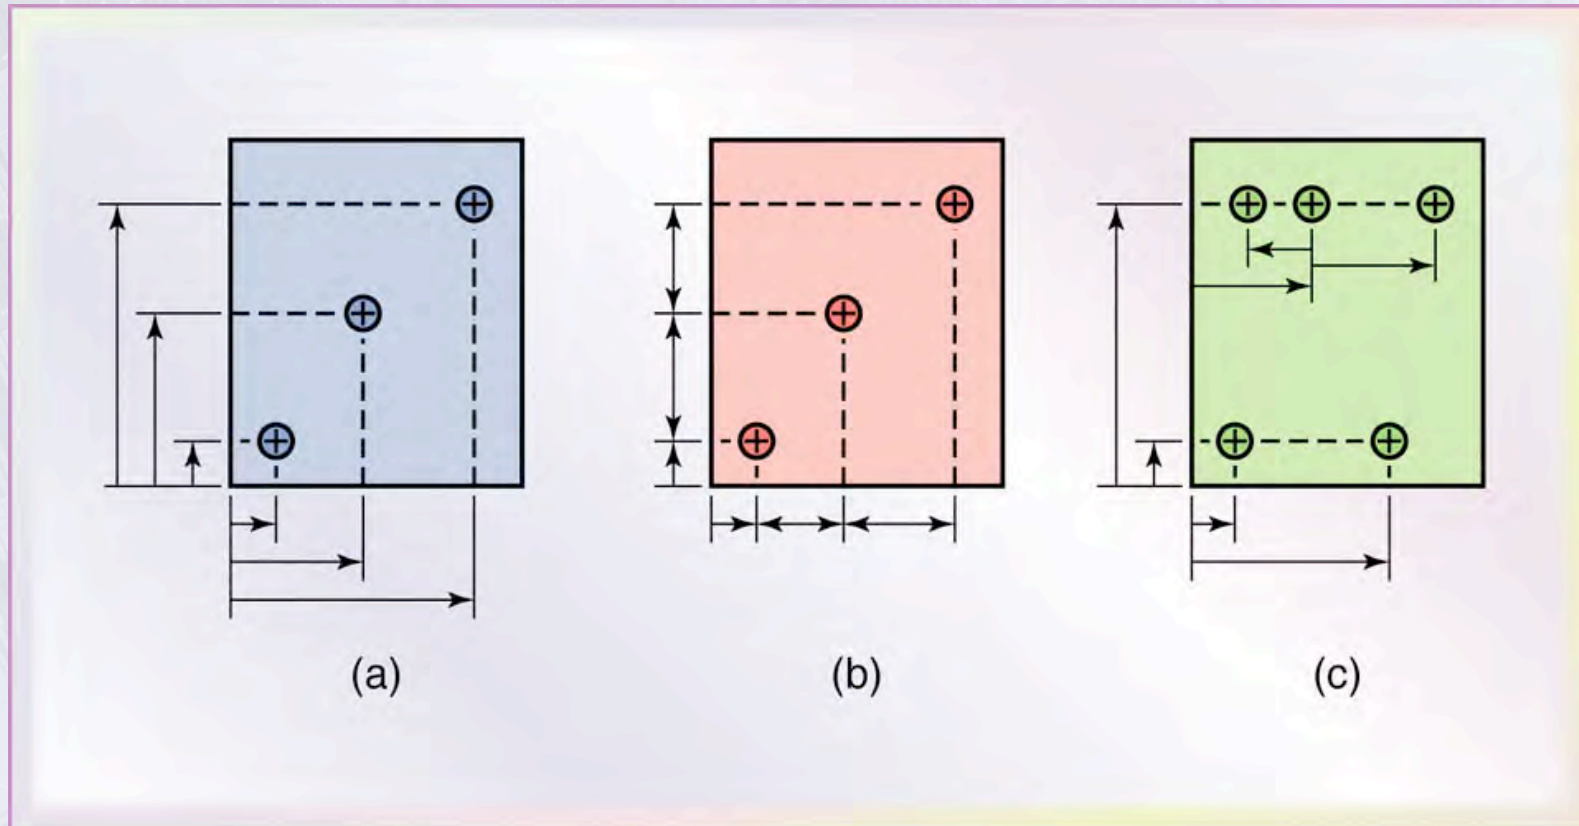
Positions of drilled holes in a workpiece. Three methods of measurements are shown: (a) absolute dimensioning referenced from one point at the lower left of the part; (b) incremental dimensioning made sequentially from one hole to another; and (c) mixed dimensioning – a combination of both methods.
